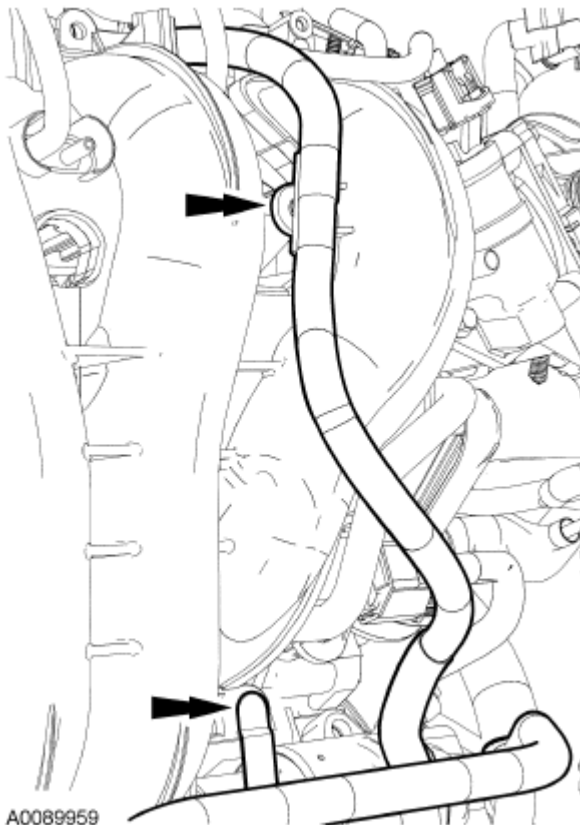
Locating Wiring Harness Retainers (2 Of 2)
